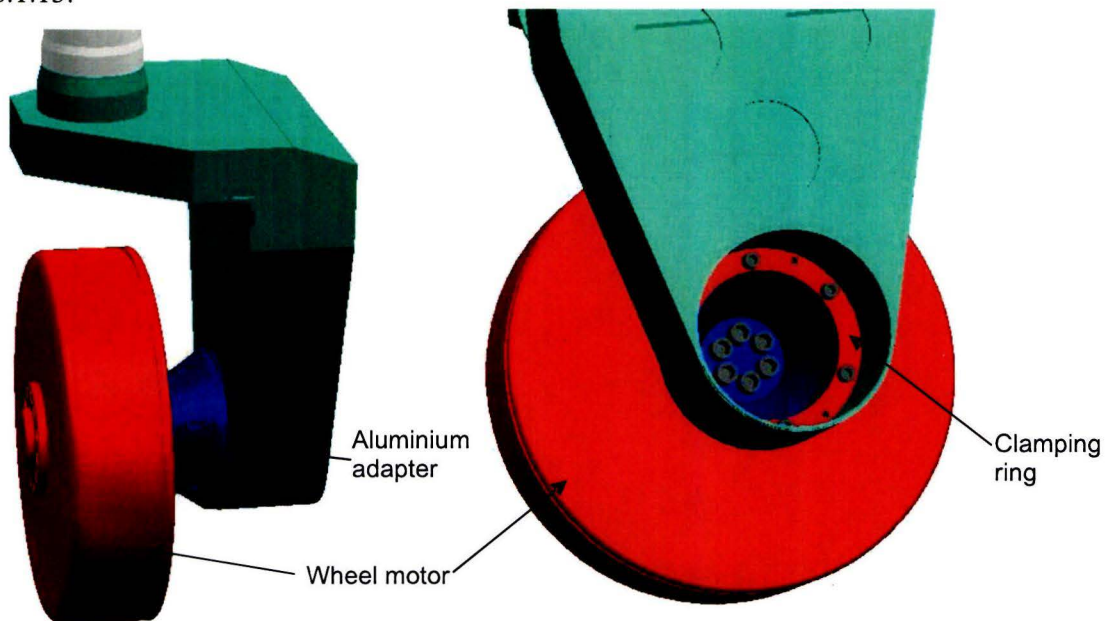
Wheel motor mounted to the adapter and the ring for clamping of the adapter (right view)
